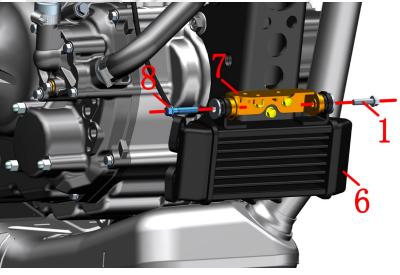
COOLING SYSTEM		Oil cooler component 1	CHK	(0)
